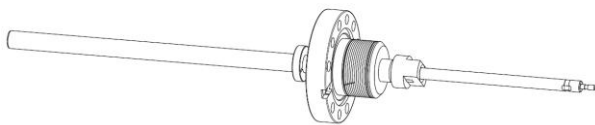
Remove the front slide bearing by turning it counterclockwise.
